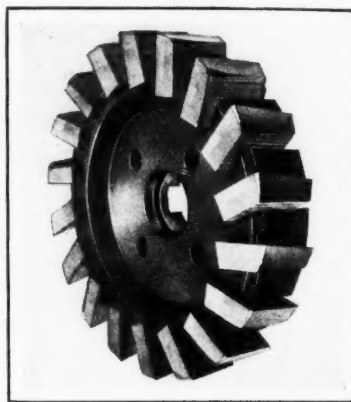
O. K. Milling Cutter for Heavy Face Cuts
